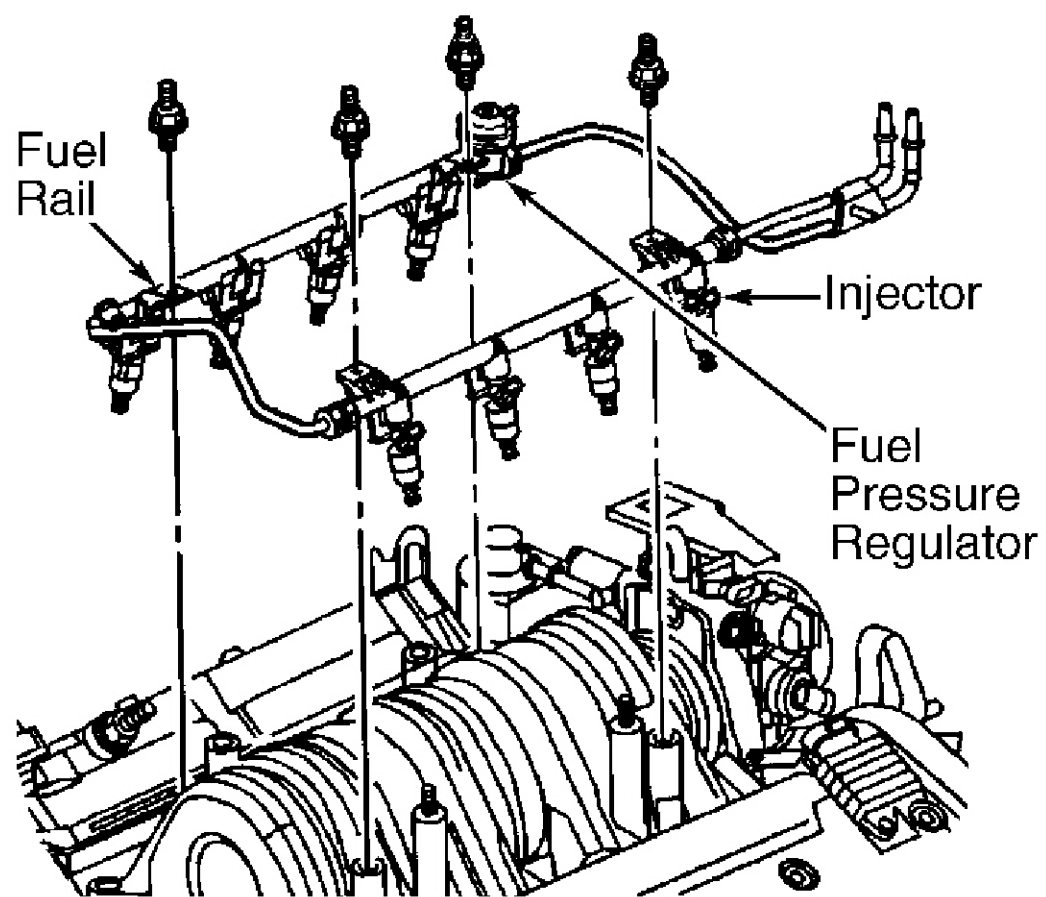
Locating Fuel Rail Assembly Components (3.8L - VIN K)
